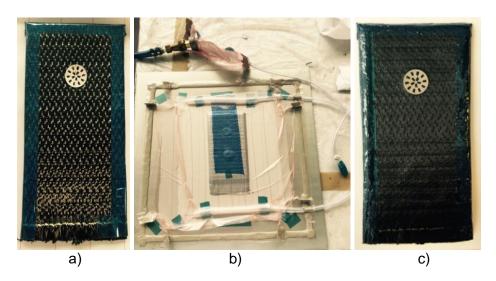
Manufacturing of specimens: dry fabric with installed metal inserts (a), prepared tool for vacuum-infusion (b), impregnated specimen (c)
